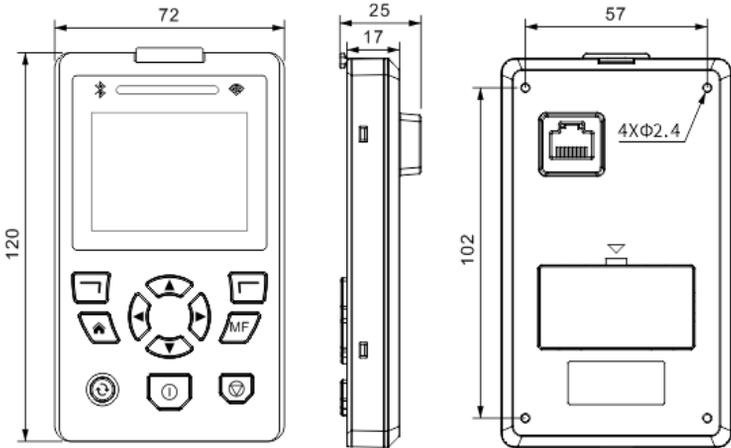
LCD Remote Keypad Installation Dimensions (unit: mm)
